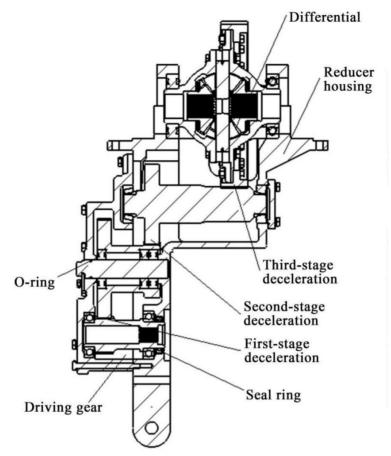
Reducer and Differential (1.5-3.8t)
